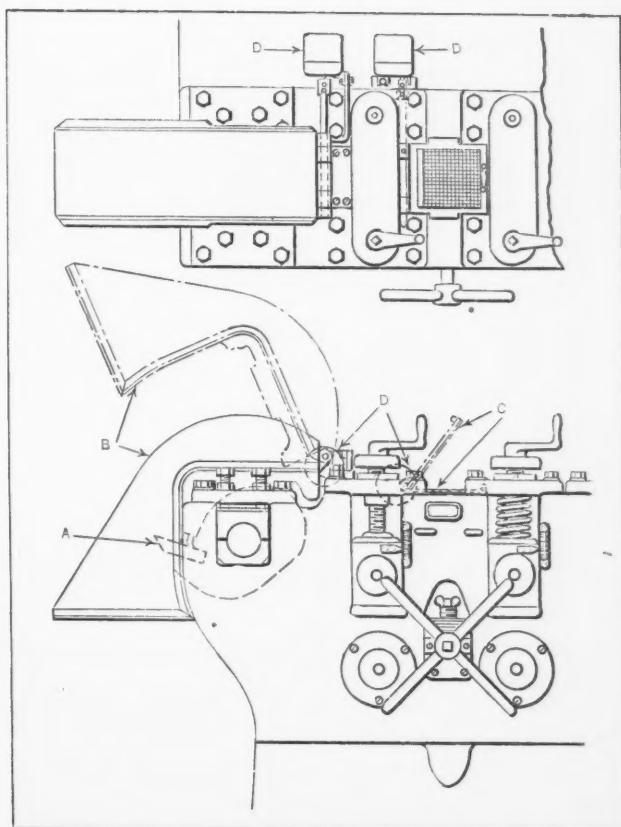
Motor-driven Machine Equipped with Automatic Safeguards
